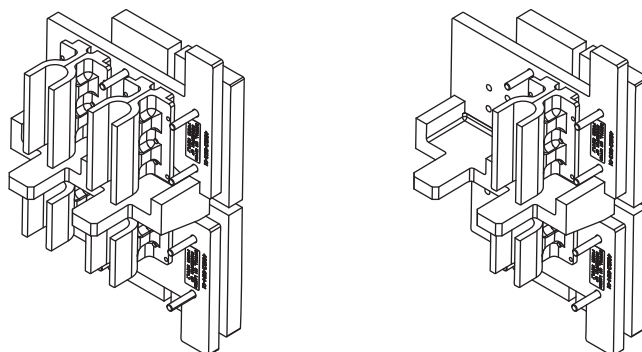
Masterpact NW Primary Injection Test Assembly
